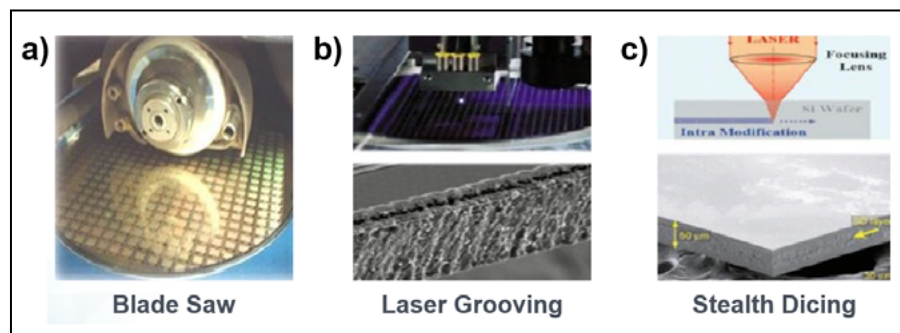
Typical wafer dicing technologies: a) (left) Blade saw; b) (center) Laser grooving; and c) (right) Stealth dicing. SOURCE: Amkor
